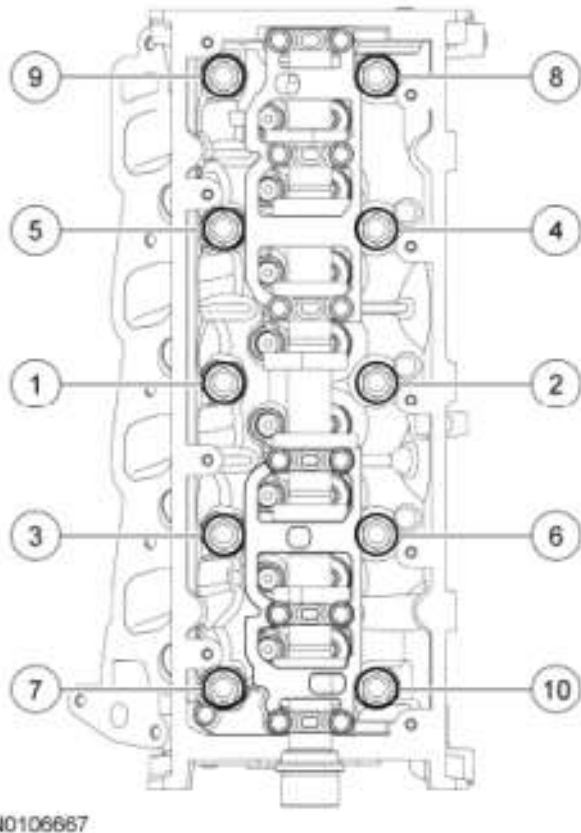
Identifying Cylinder Head Bolts In Sequence
